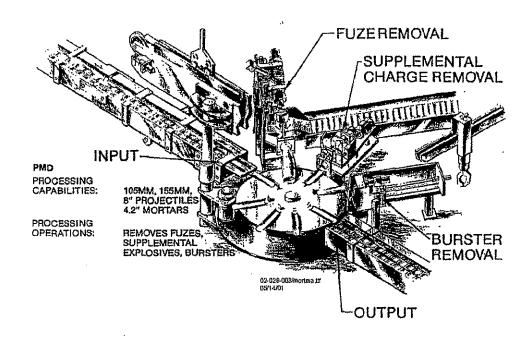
Figure Attachment D-1-2. WHEAT Projectile/Mortar Disassembly Machine
